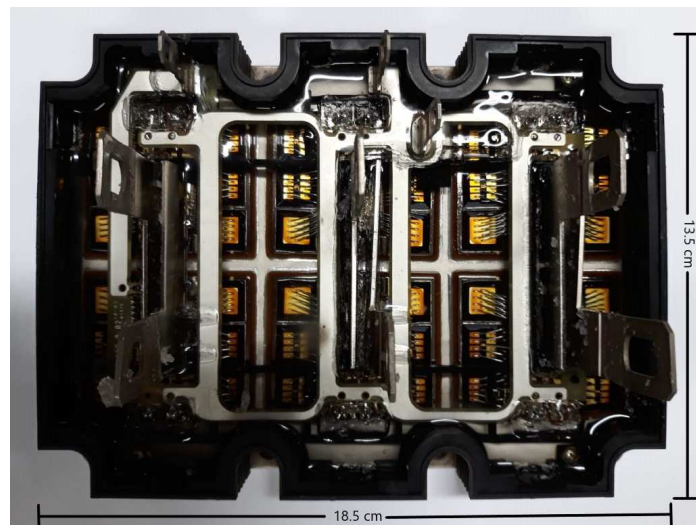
Dimensions of a multichip power module with 36 dies.
